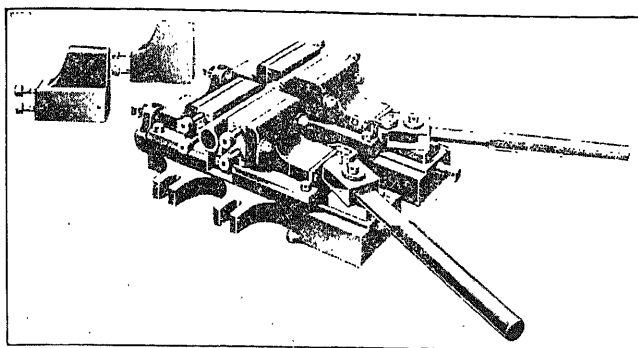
Clamp Used for Pipe Welding.
